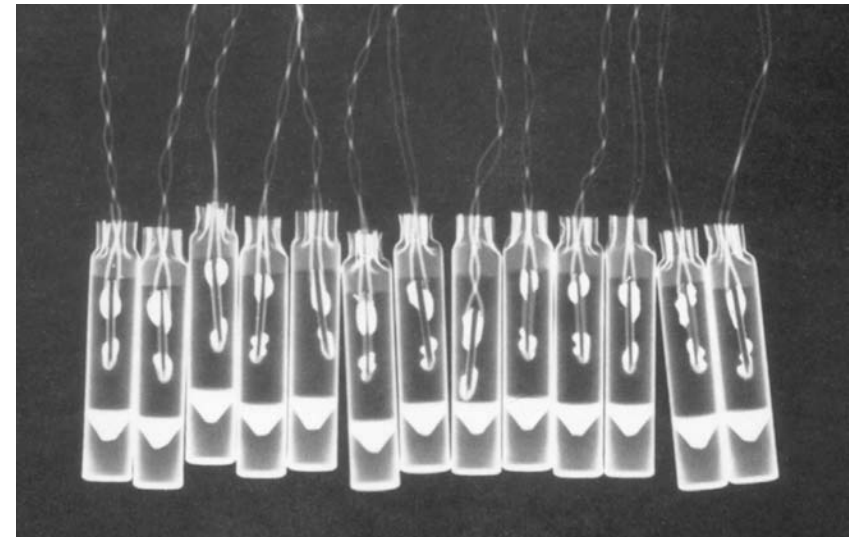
Radiograph of electric detonators, taken to check details of assembly
